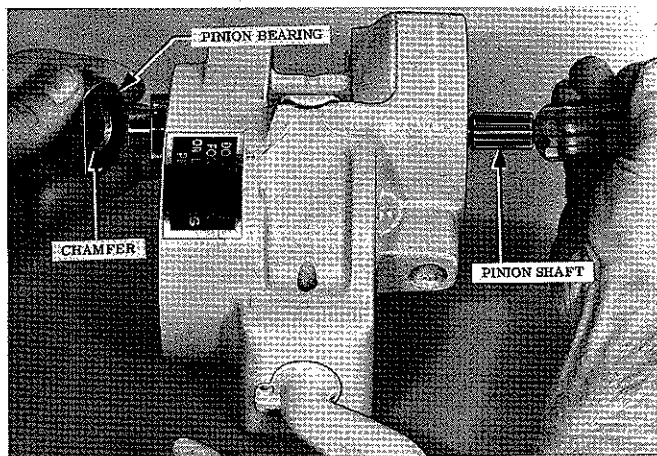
Removing Pinion Bearing from Frame and Pinion Shaft
